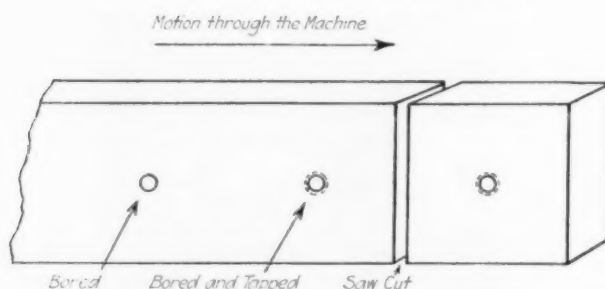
STEPS IN MAKING SQUARE-KNOB BLANK
